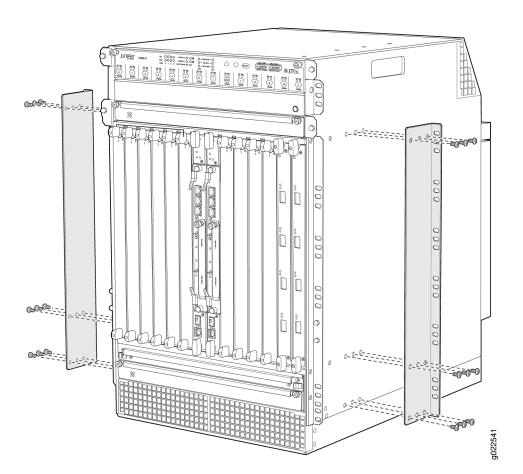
Moving the Mounting Brackets to the Center of the Chassis in an EX9214 Switch
